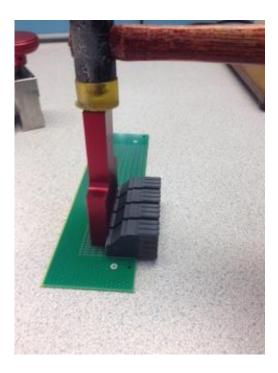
Back stiffener installation on Paladin connectors pressed into a board
